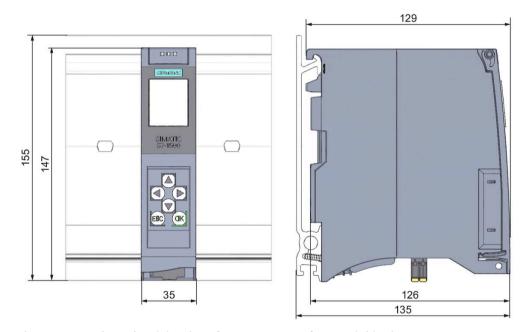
Dimensional drawing of CPU 1511-1 PN, front and side views
